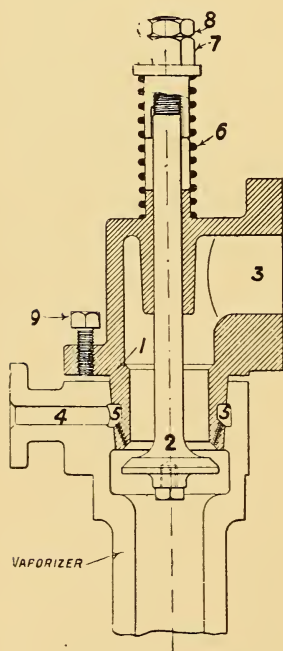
Section through inlet valve and plug of Campbell Oil Engine.
